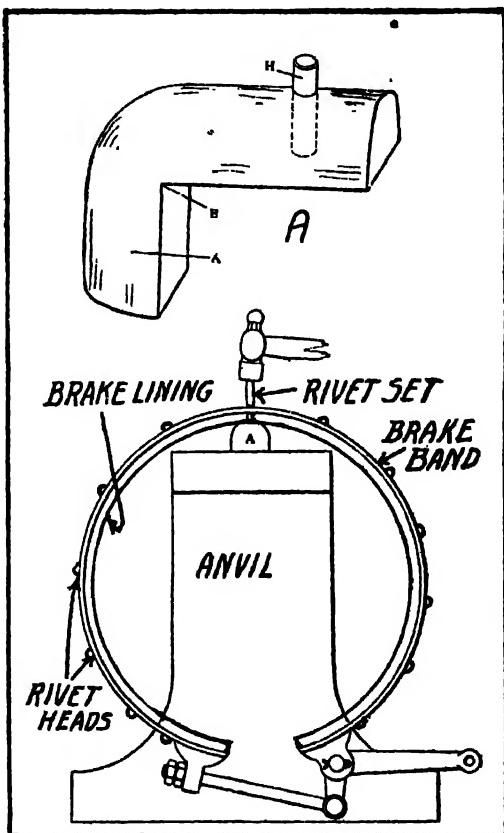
Simple Fixture to Facilitate Riveting Brake Lining to Steel Brake Bands.
